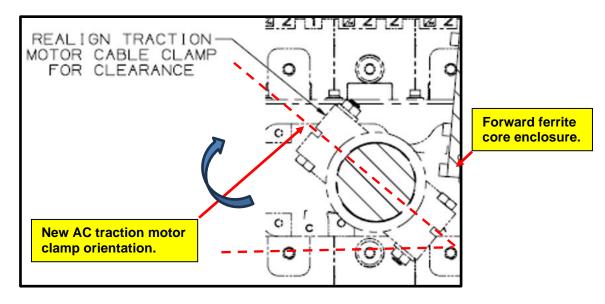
View inside forward inverter rack - Adjust AC traction motor clamp
